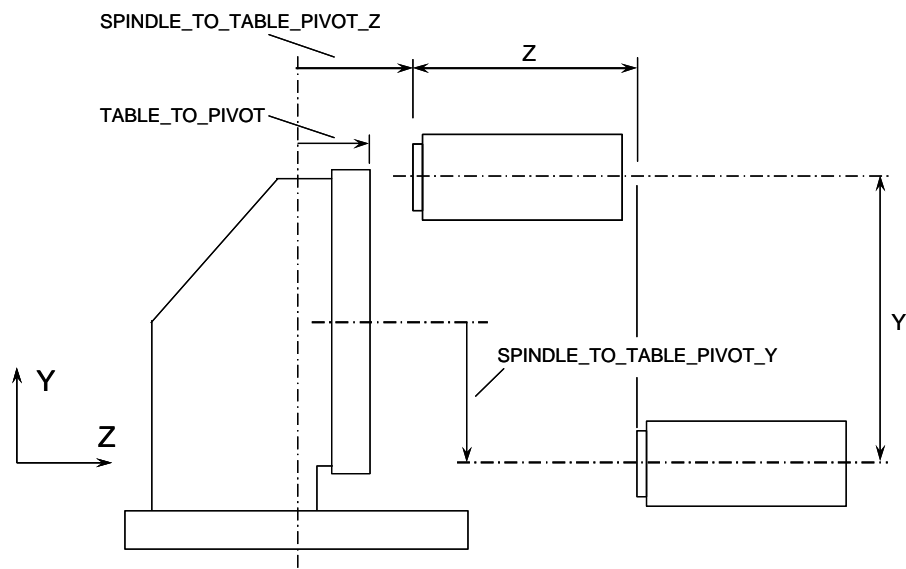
Work zone parameters for a horizontal machining center with a combination B- and C-axis rotary table.
